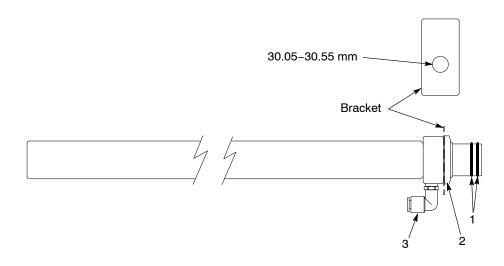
One-Piece Fluidizing Pickup Tube Kit
